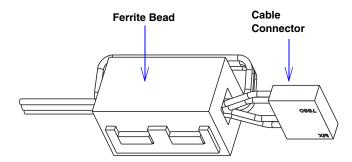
Ferrite bead on temperature sensor cable connector end
